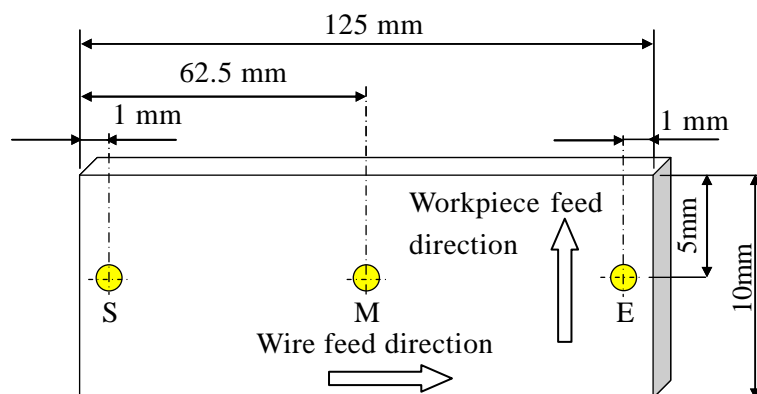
Cross section of workpiece showing measurement points: wire entrance side (S): middle of the workpiece (M): wire exit side (E)
